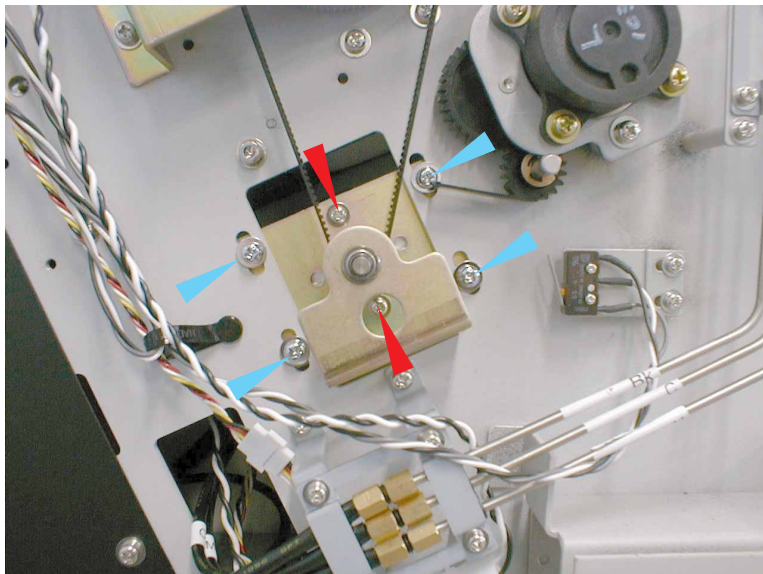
PF Motor Assembly/Speed-Reduction Frame Removal
